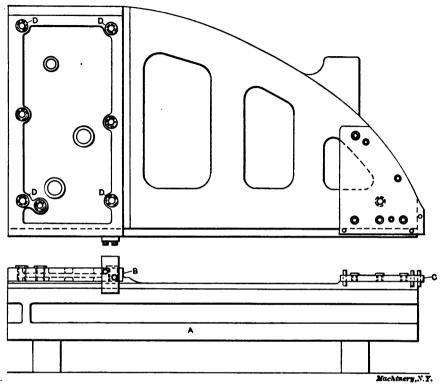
Front Housing with Jigs in Position for Drilling Clamping Bolt Holes. Same Jigs are used for Similar Operations on the Back Housing
